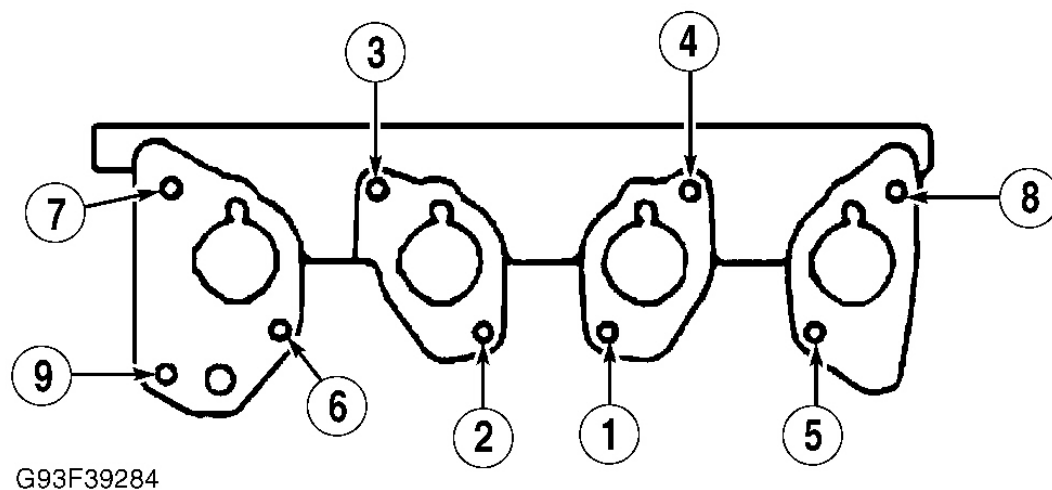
Lower Intake Manifold Nut Tightening Sequence
